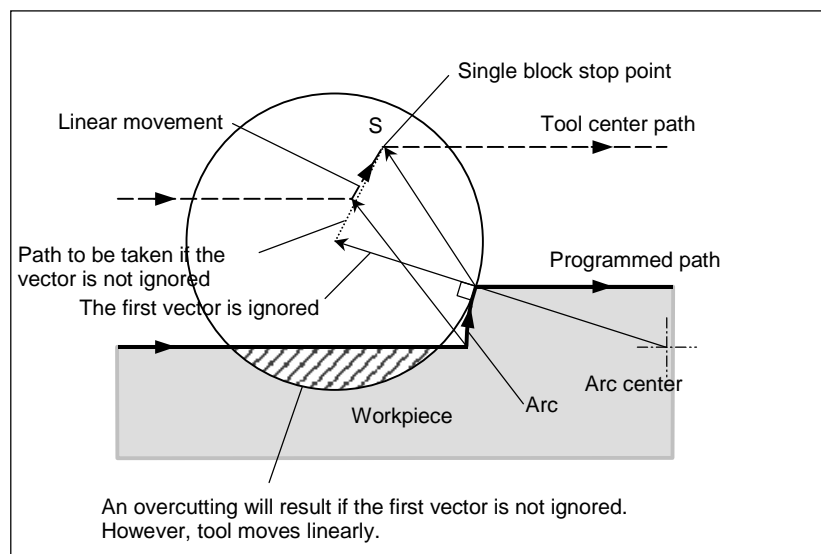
(c) Machining a step smaller than the tool radius
